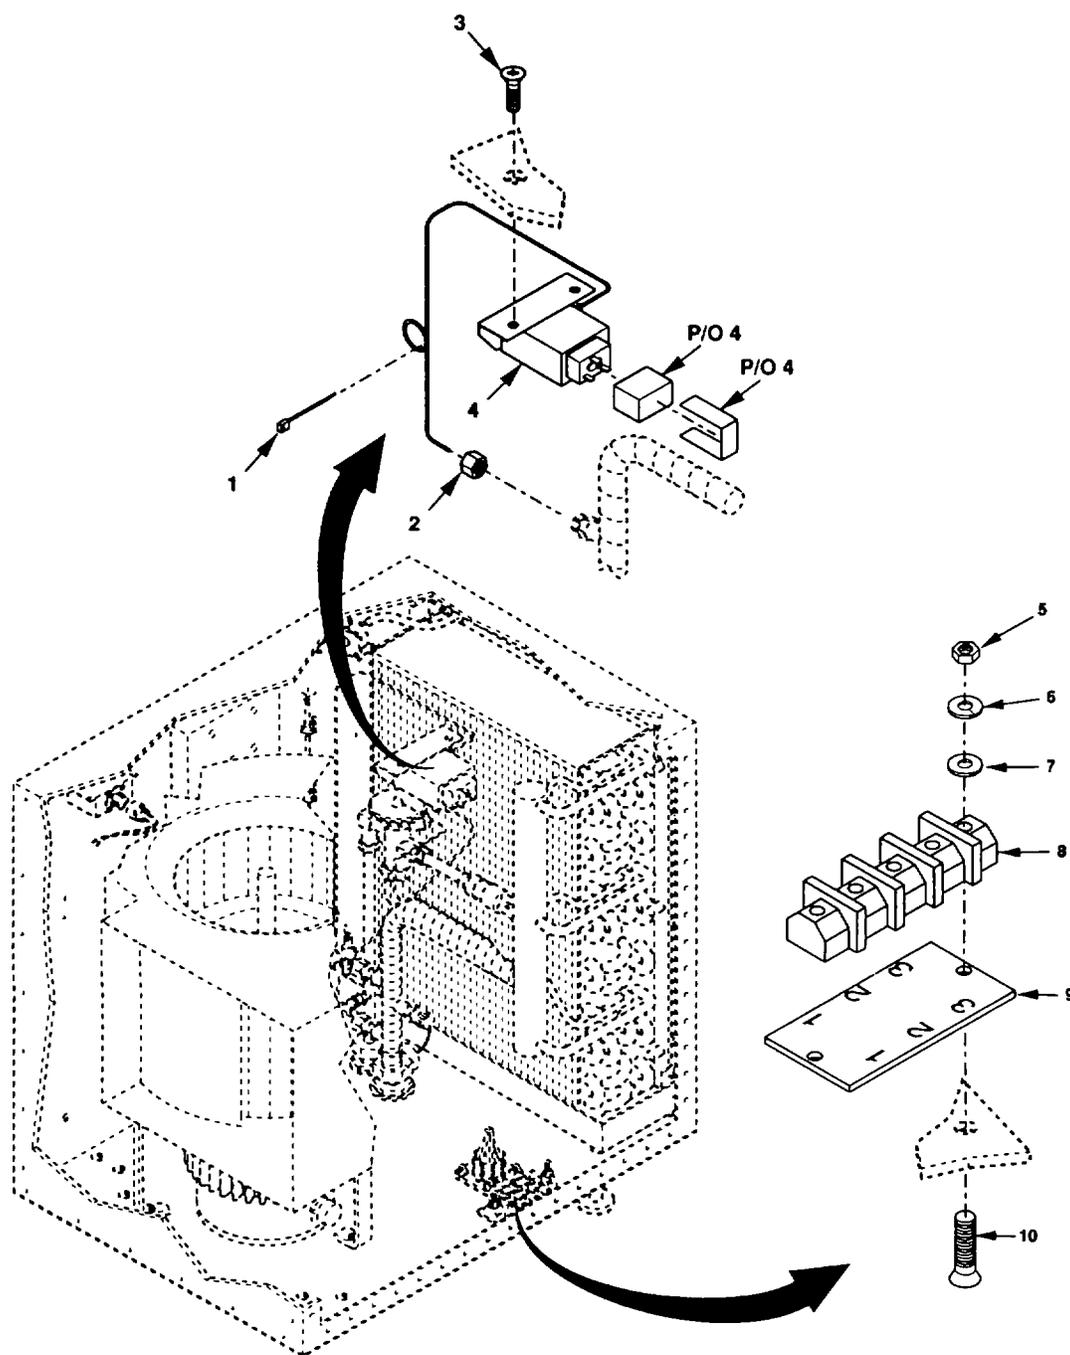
Pressure switch, Terminal Board, and Marker Strip
